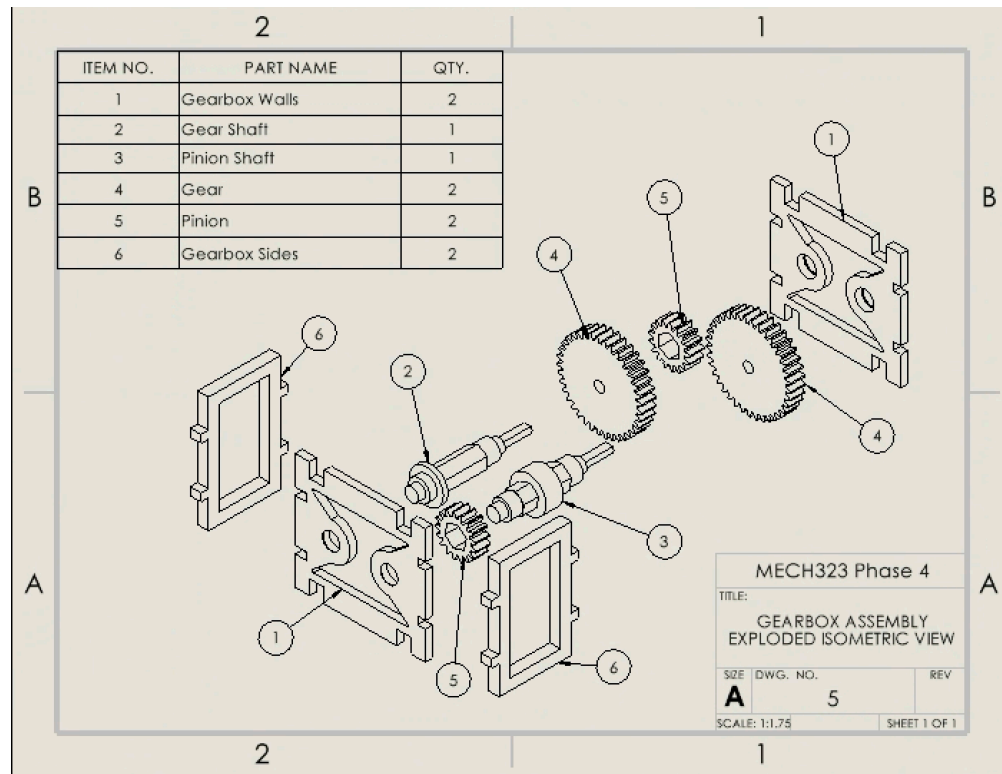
Exploded isometric view of the fully assembled gearbox, highlighting all gearbox parts with numbers and their respective names and quantities
